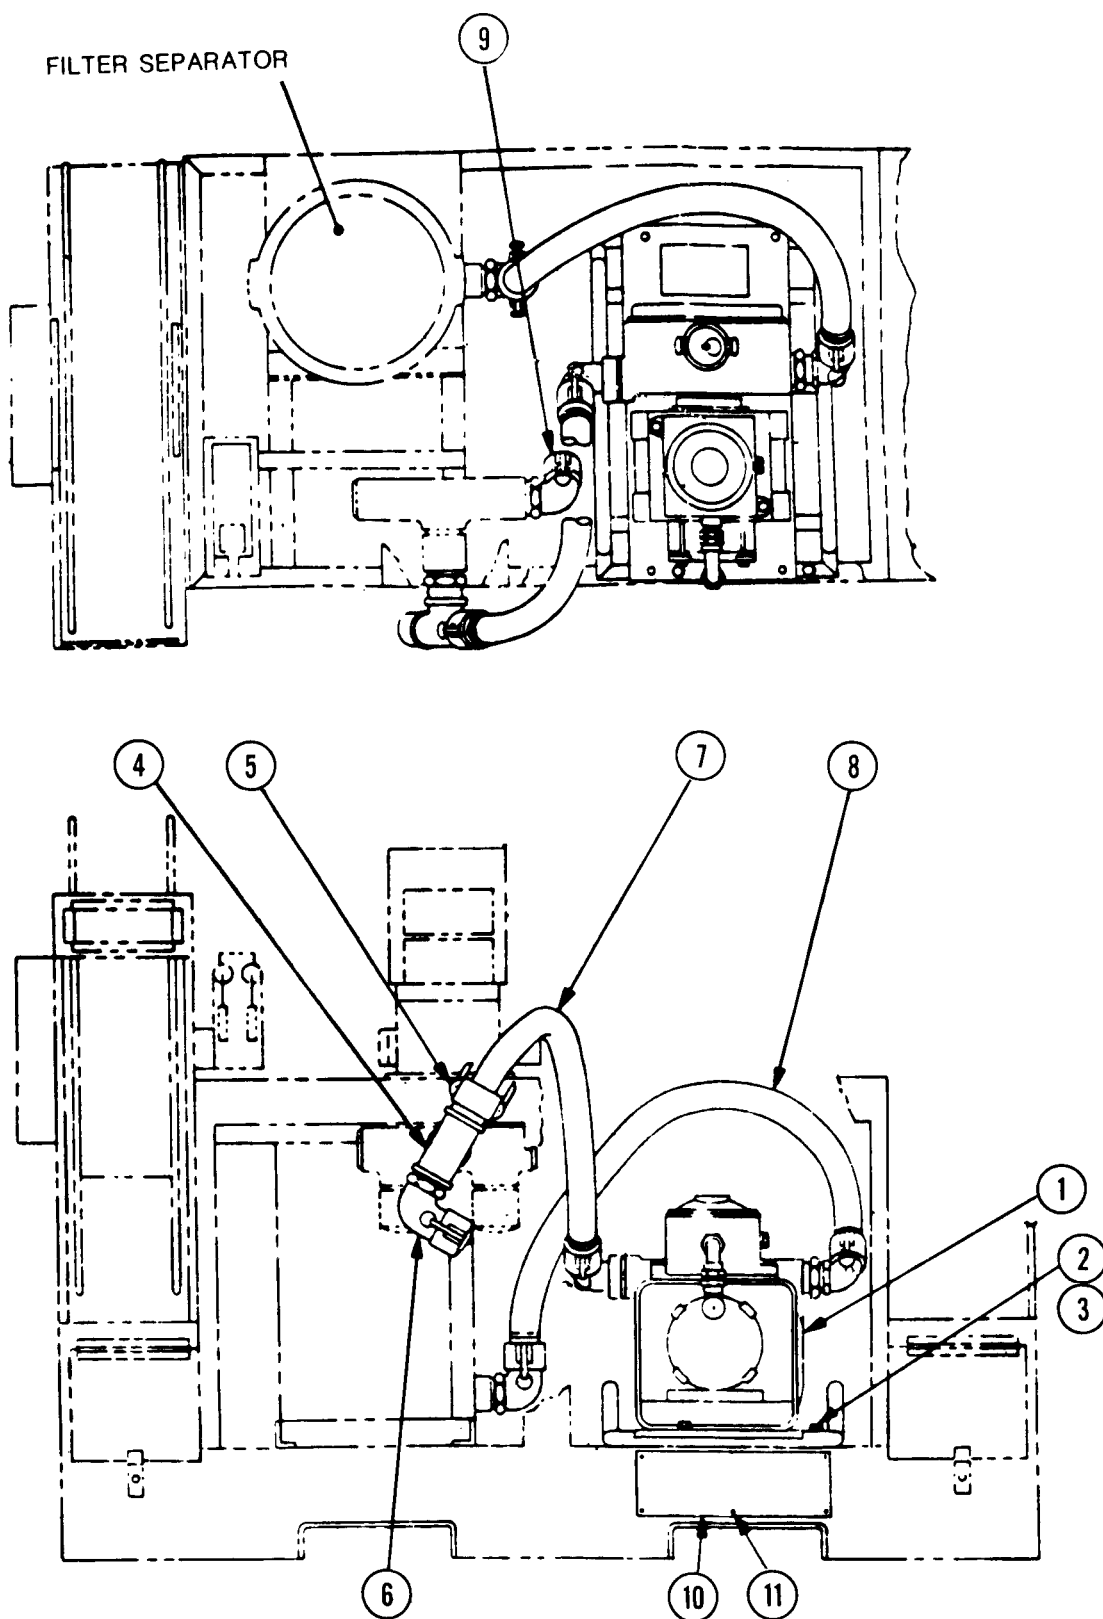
Conversion of Gasoline Engine Driven Pumping Assembly to Electric Motor Driven Pumping Assembly.
